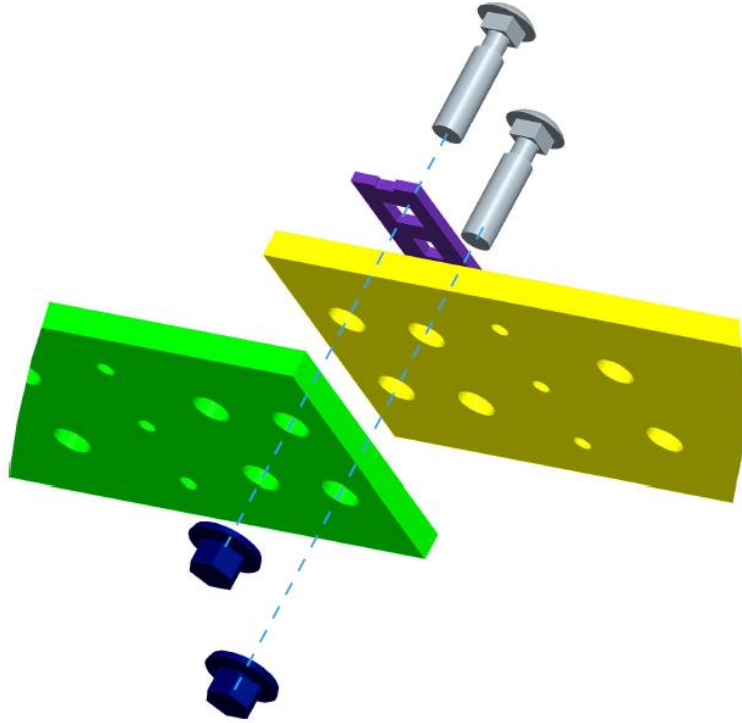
CAD Model of Resistance Measurement Assembly.
